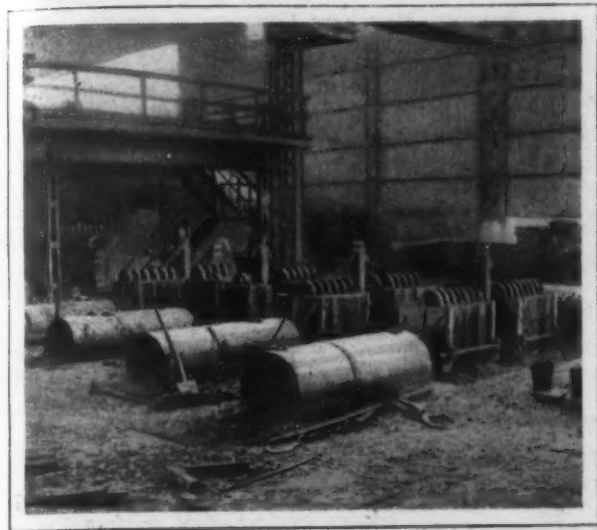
Apparatus for Casting Small Ingots in a Belgian Mill
